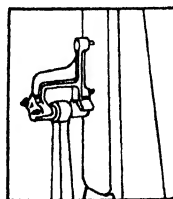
Illustrating use of the Auxiliary Gauge A (Fig. 129) on the Gudgeon Pin, as a check for Connecting-Rod Bending.
